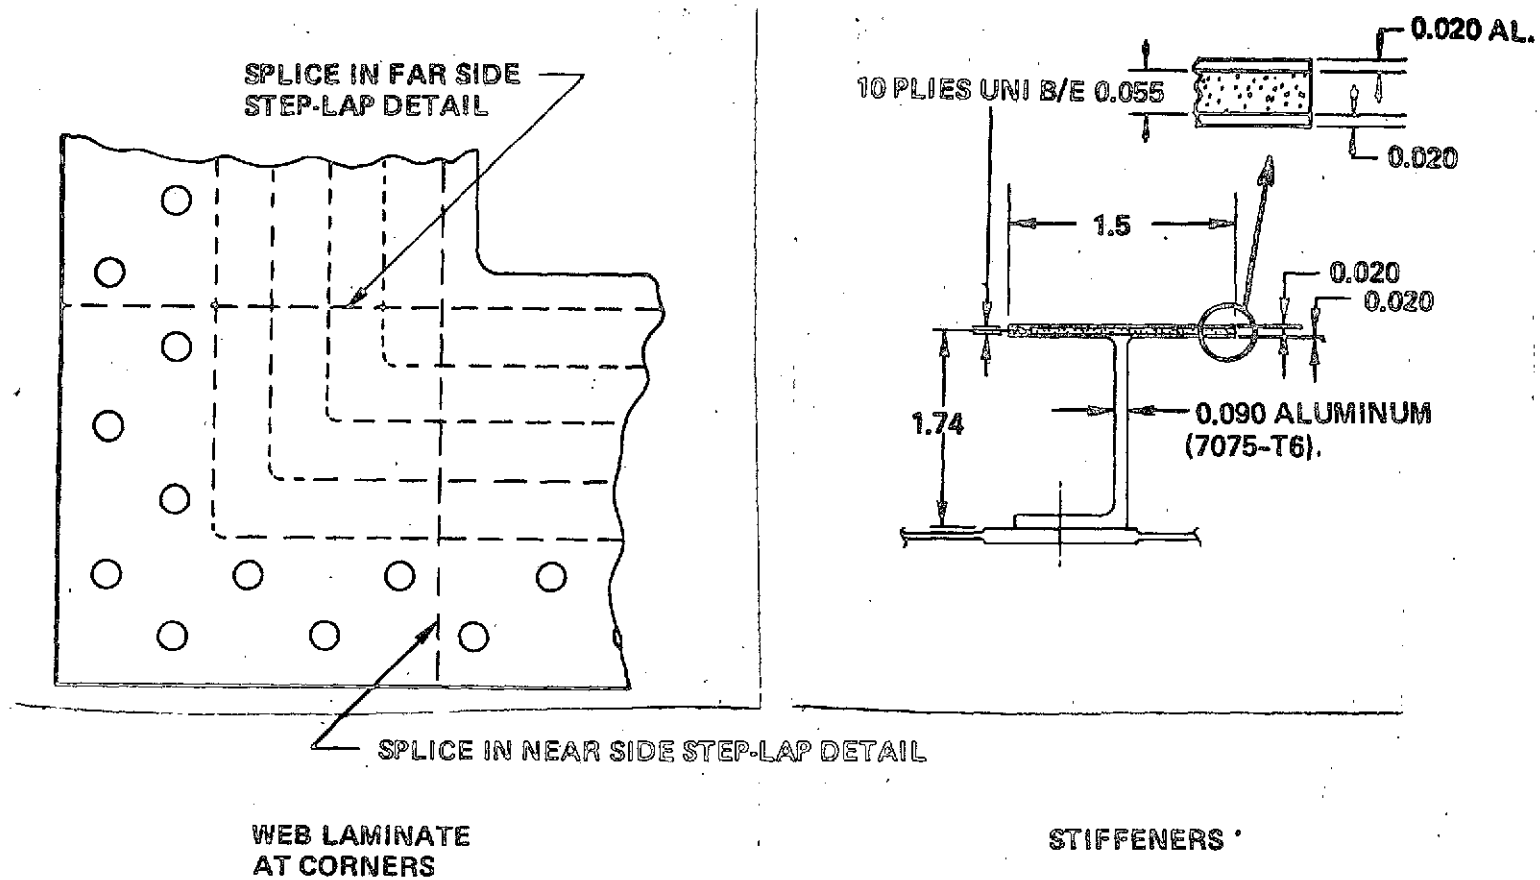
B/E REINFORCED SHEAR WEB DESIGN DETAILS
